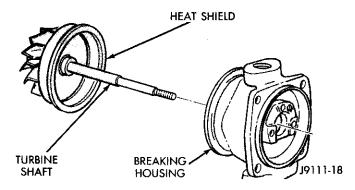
Turbine Shaft/Heat Shield to Bearing Housing
